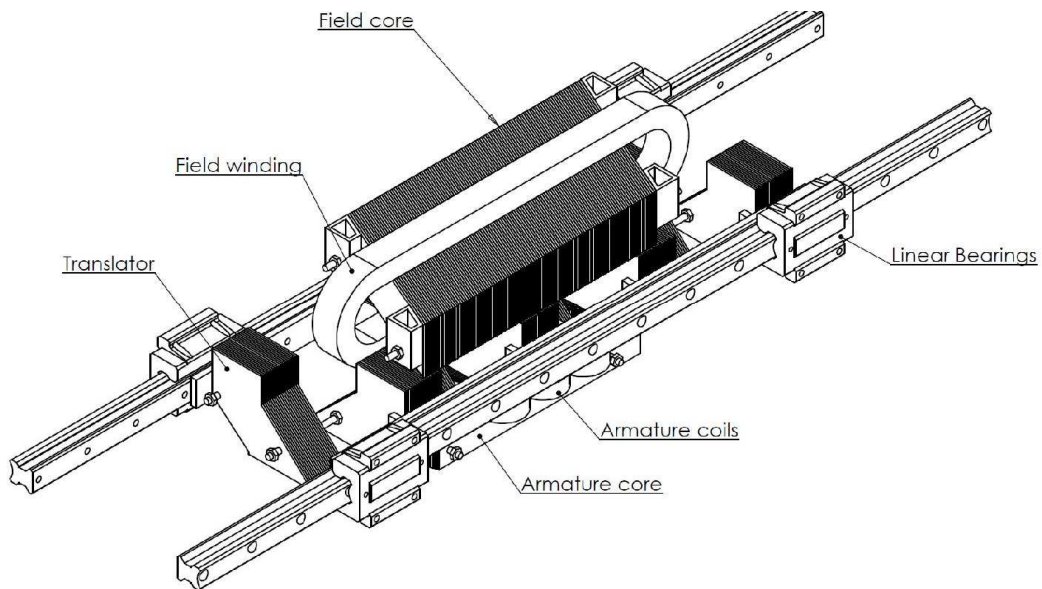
Isometric view of the linear claw pole prototype active topology including bearings
